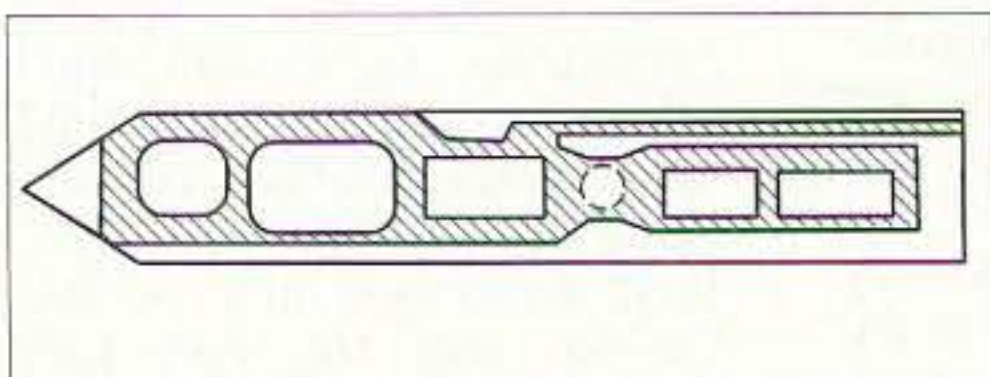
Single-sided printed circuit board layout for the FET probe with Mini-Circuits MAR-1 or MAR-2 MMIC.
